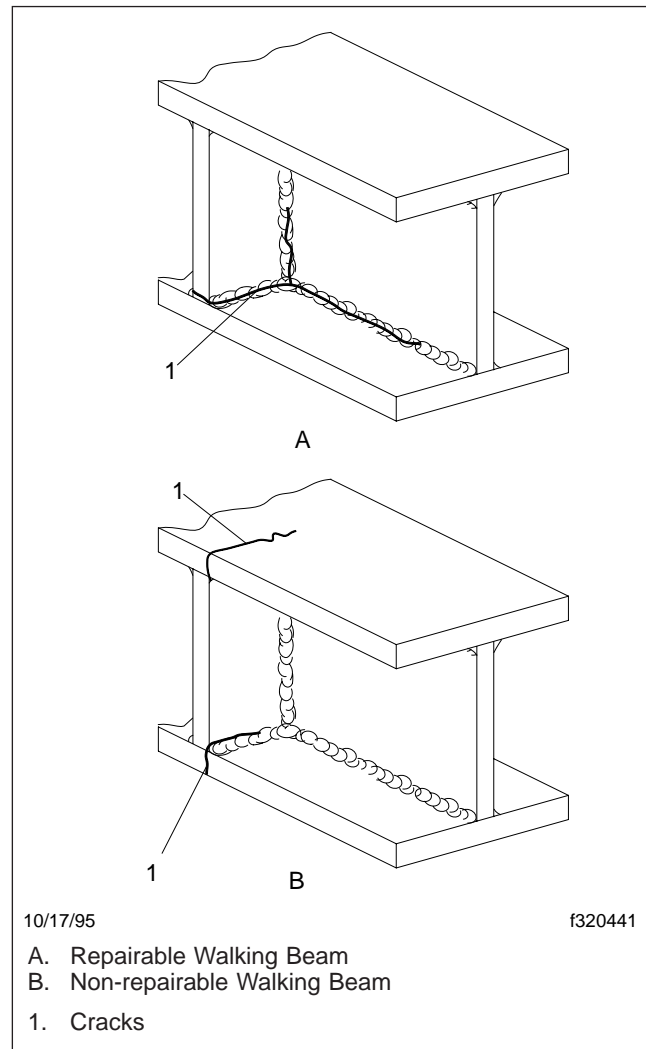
, Repairable/Non-repairable Beam Cracks
